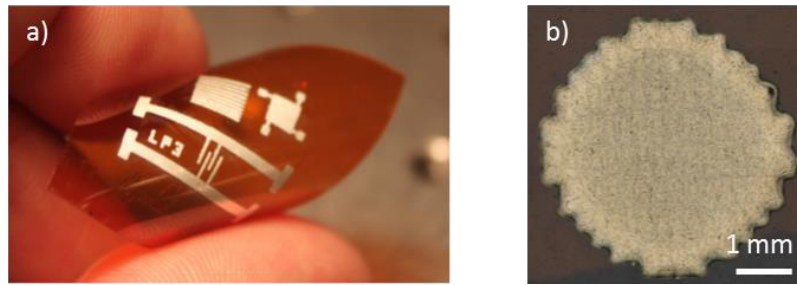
LIFT printed a) contact pattern and b) contact pill.
